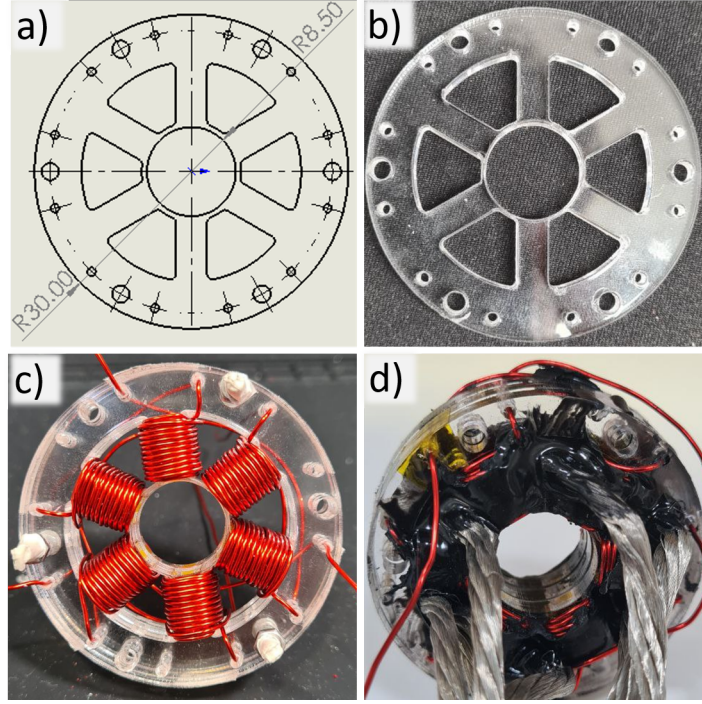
a) Design of the core pattern, b) One core piece, c) The stator made of a stack of core pieces shown in b and the copper winding, and d) The stator winding as used in the vacuum chamber.
